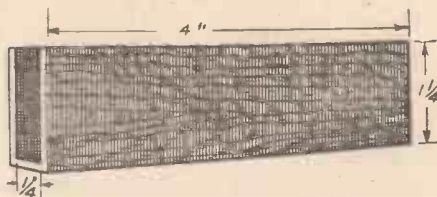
Trigger mechanism housing (3/32in. sheet brass).
